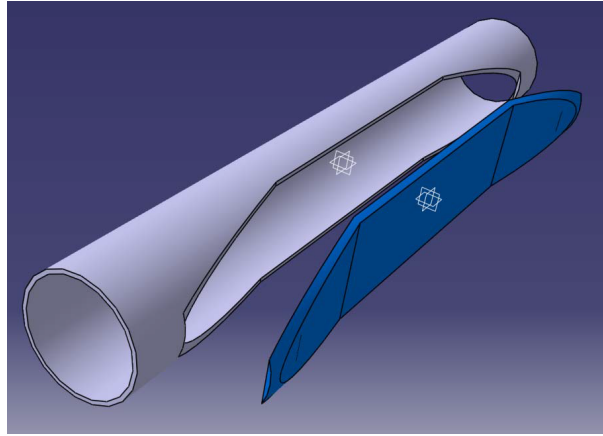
Alternative design with stainless steel tube laser welded to AlBeMet top piece (shown in blue), including the thin window.
